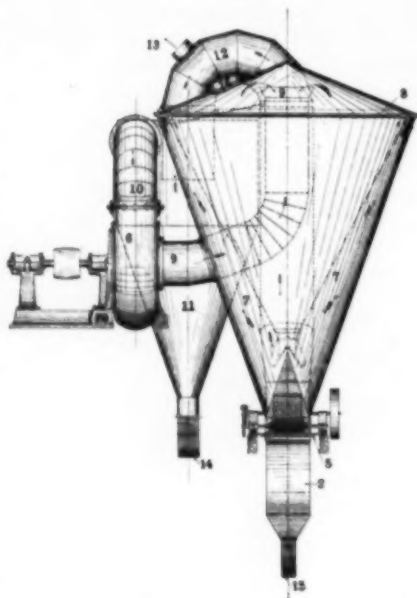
SECTIONAL VIEW OF VACUUM SEPARATOR
